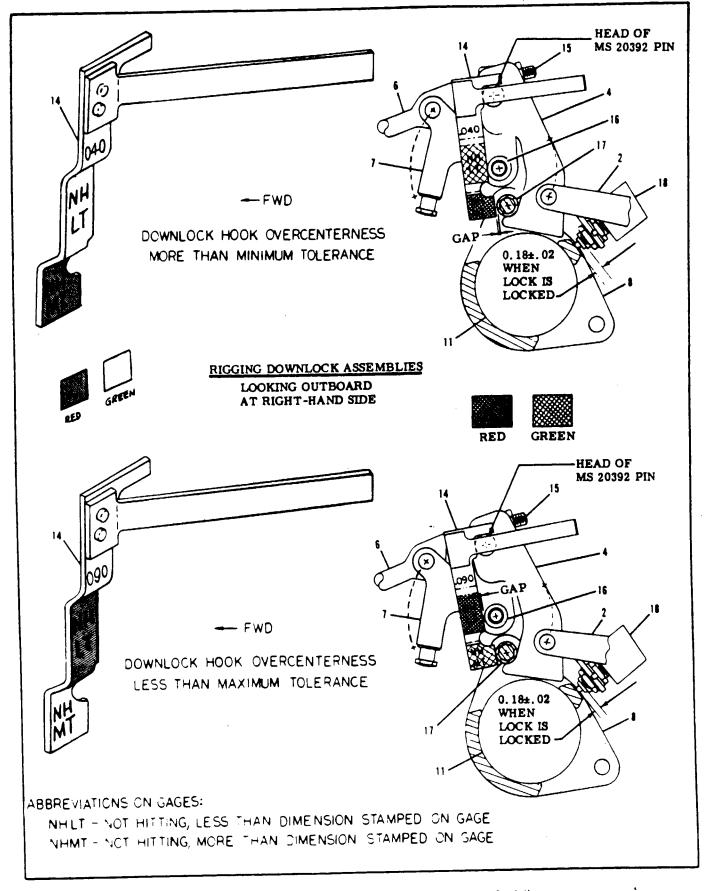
Rigging Main Landing Gear (Sheet 2 of 4)
